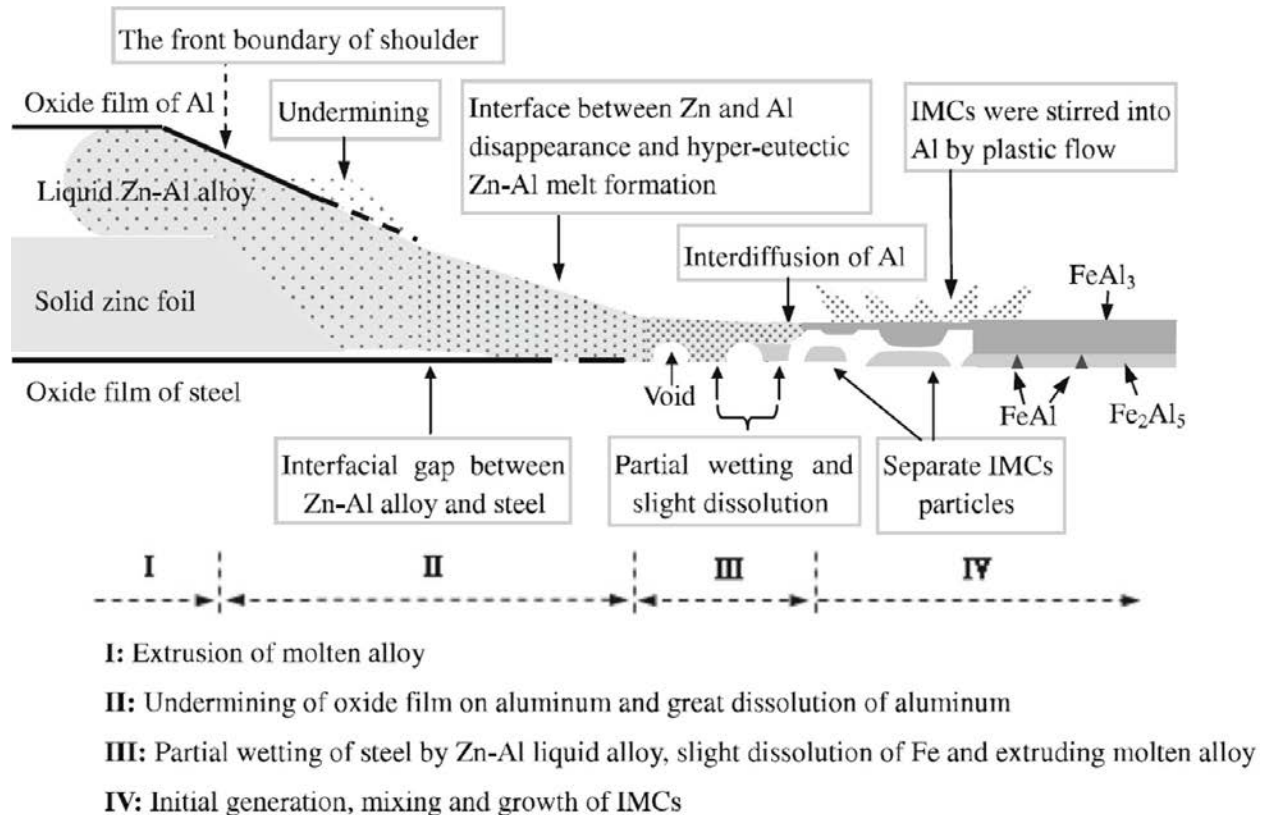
The schematic of the mechanism of the joining in the combined technique of gas tungsten arc welding and brazing [118].
